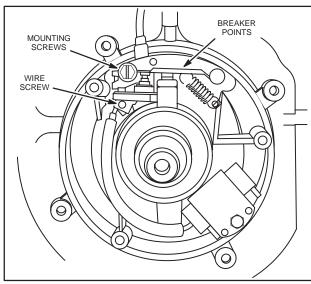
REMOVING STYLE III BREAKER POINTS
